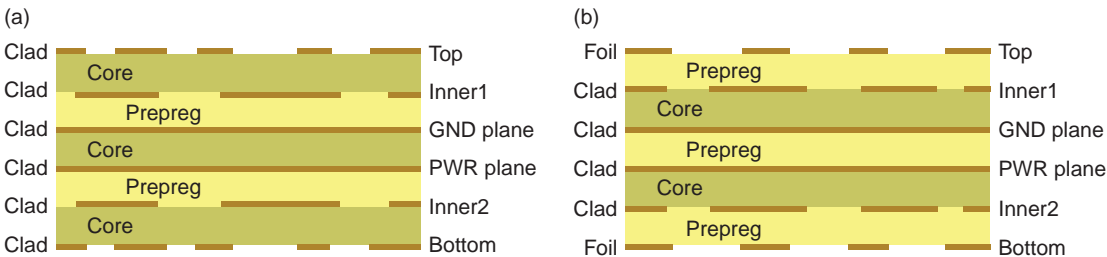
Two stack-up methods for a six-layer board. (a) Multicore, outer clad. (b) Multicore, outer foil.
